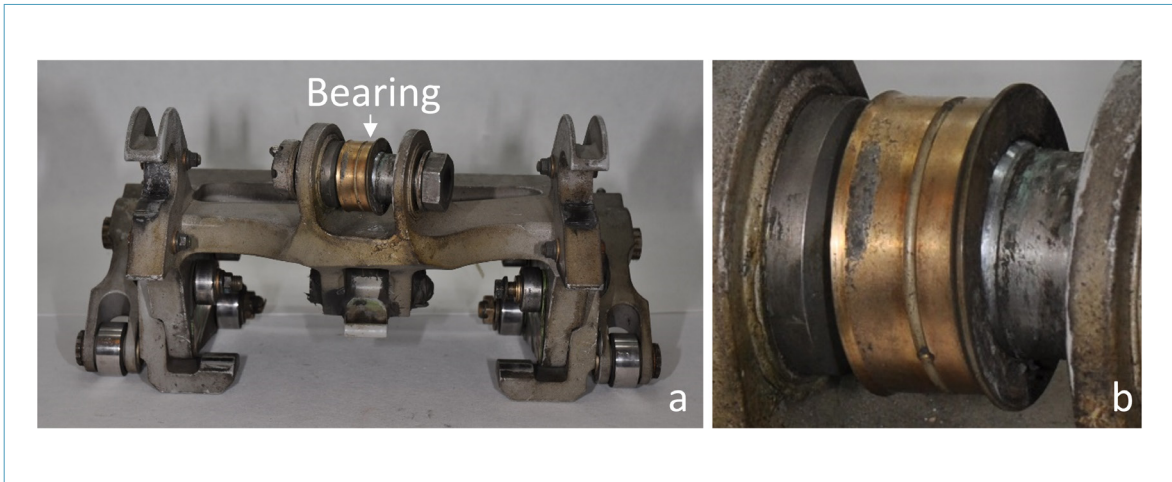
Sequence carriage assembly 6 with outboard foreflap fitting bearing (a) and close up of the bearing (b). (Source: owner of the aircraft)
